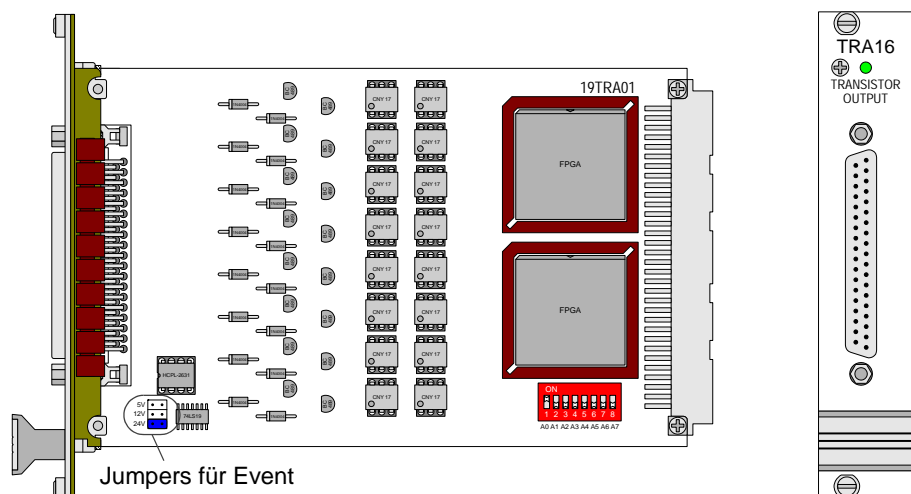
Pro-TRA-16 REVA: Board and front panel
